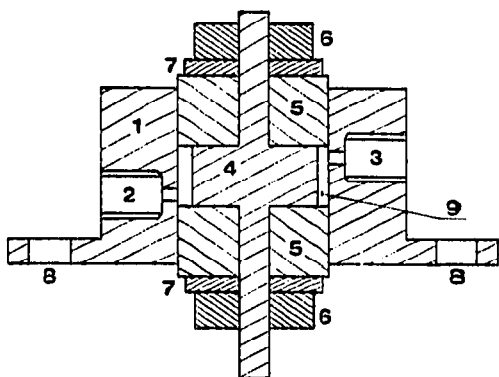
Schematic section through the detection cell. 1 = Outer earthed plate; 2, 3 = openings with inner threads for screwing the heat exchanger and outlet tubing; 4 = inner plate; 5 = Teflon sealing ring; 6 = nut; 7 = support; 8 = openings for fixing screws; 9 = dielectric space.
